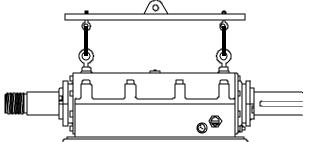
Recommended Lifting Jig for Bearing Housing
